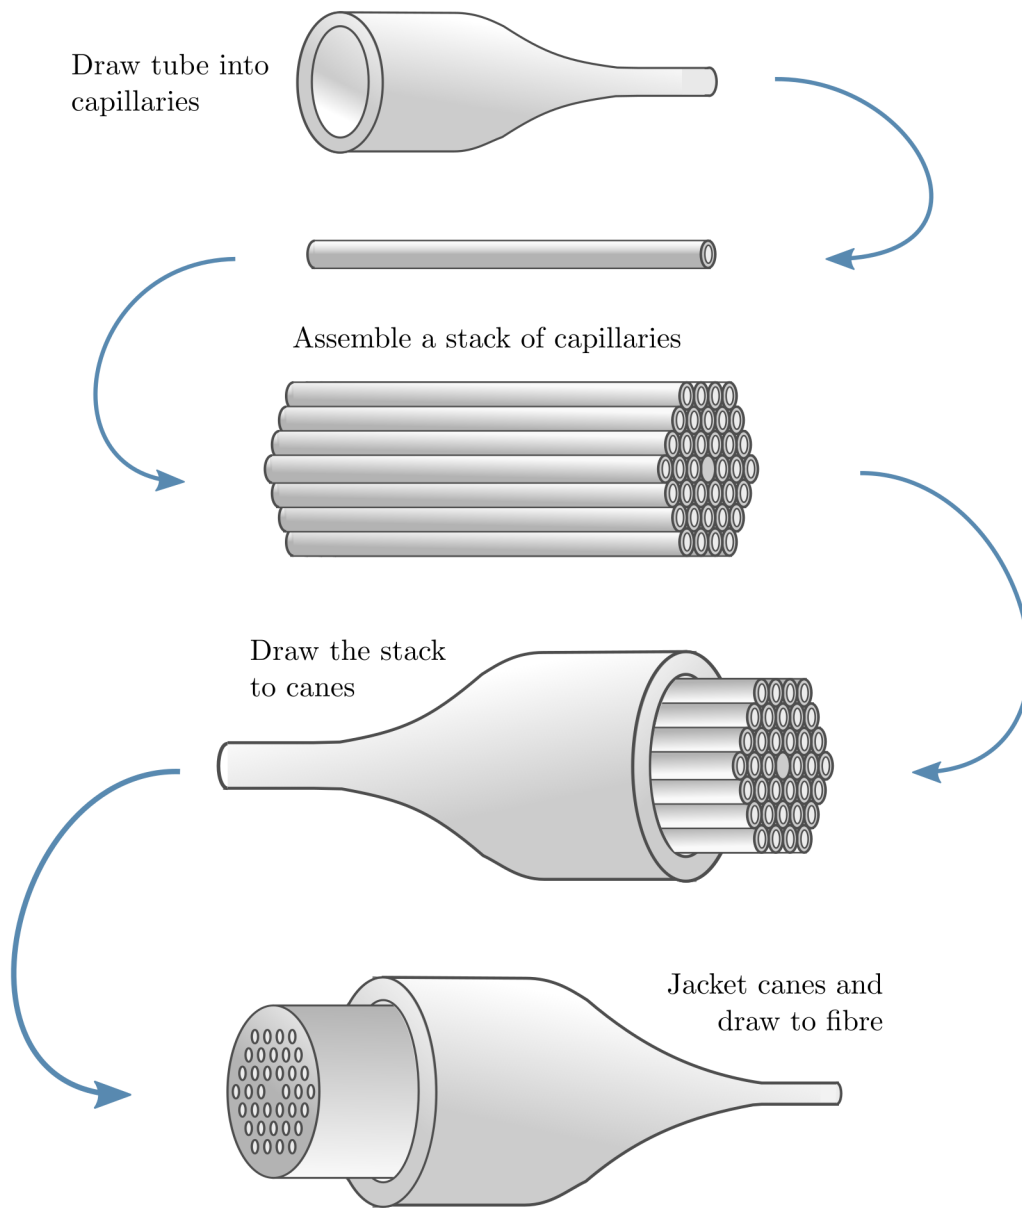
The Stack and Draw technique of PCF fabrication.
